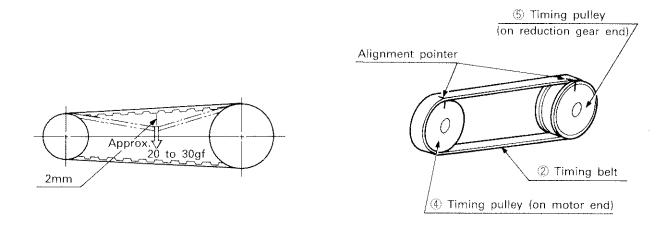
Checking the Timing Belt for Proper Tension
